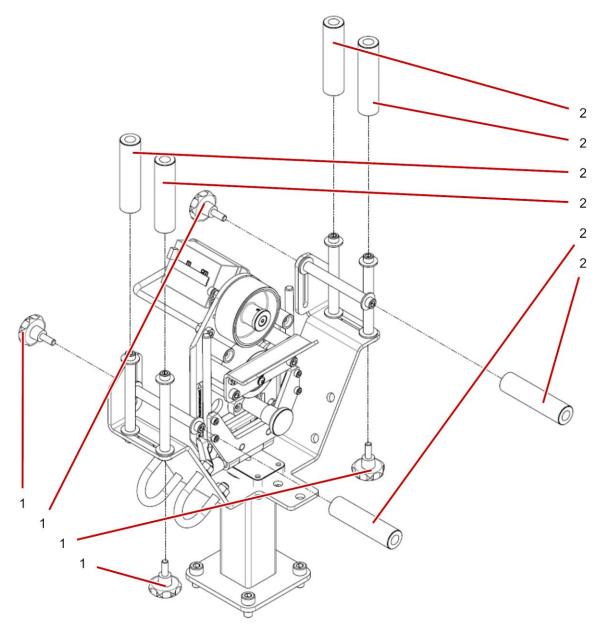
Replacement parts for roller cages - MESSBOI 25
